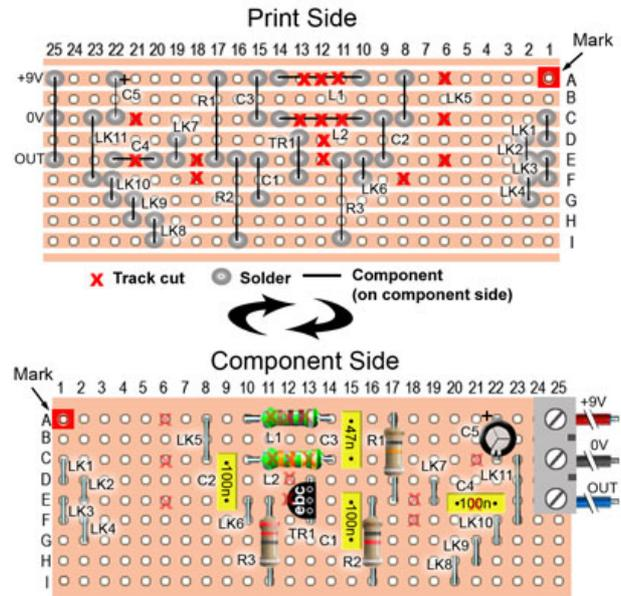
Hartley Oscillator - Stripboard Layout
